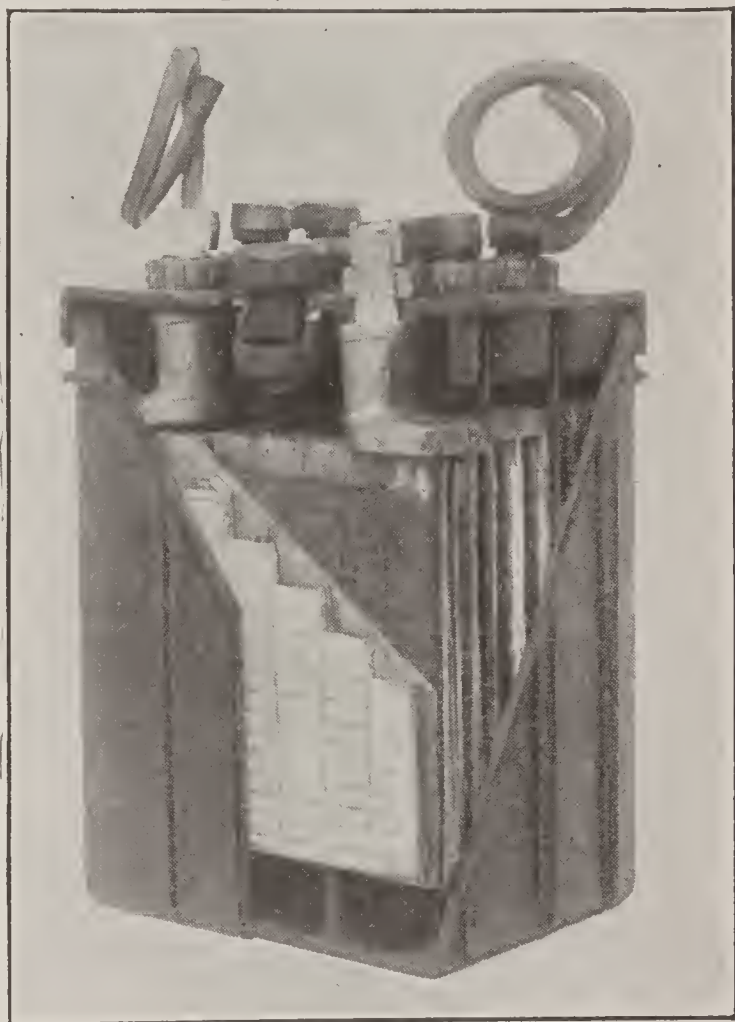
Typical Starting Battery with Plates Cut Down, Showing Assembly
